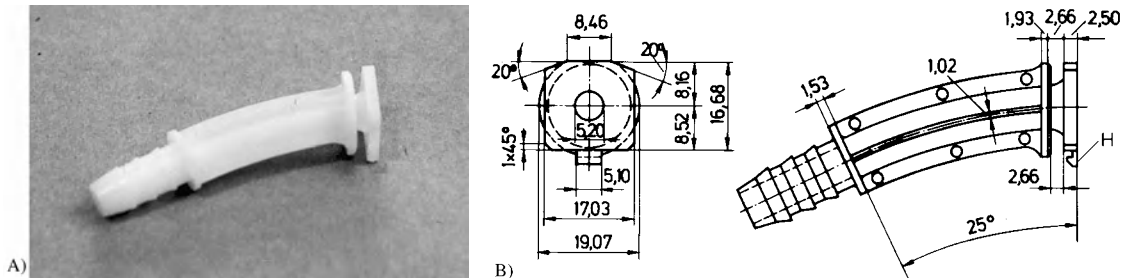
The pipe elbow (A) has a curved bore as shown in drawing (B)
